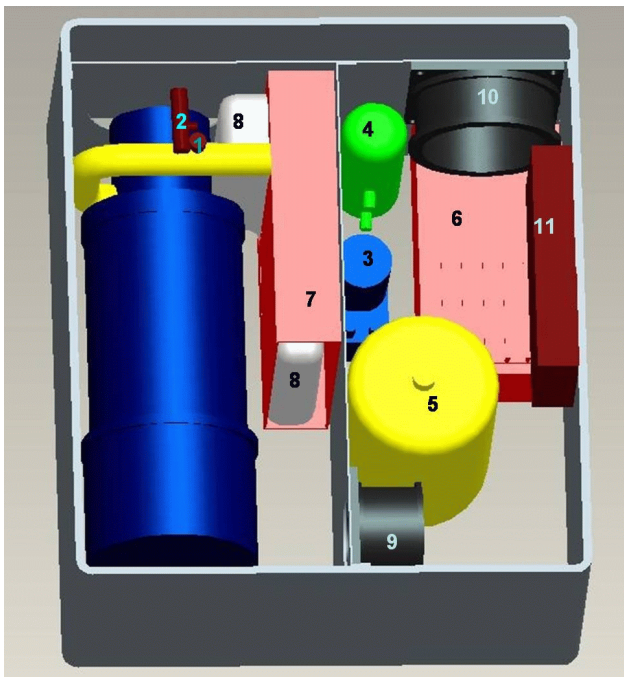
300 W MICE Generator Packaging Design with 9" x 8" x 4" Outer Dimensions; MICE generator is in blue on left; other components are: 1,2- MEMS fuel atomizer & solenoid valve; 3- Fuel pump; 4- Pressurized fuel reservoir; 5- fuel tank, 200 ml; 6- Electronics package; 7- Inlet air heat exchanger shroud; 8- muffler; 9- small fan; 10- large fan; 11- rechargeable battery.
